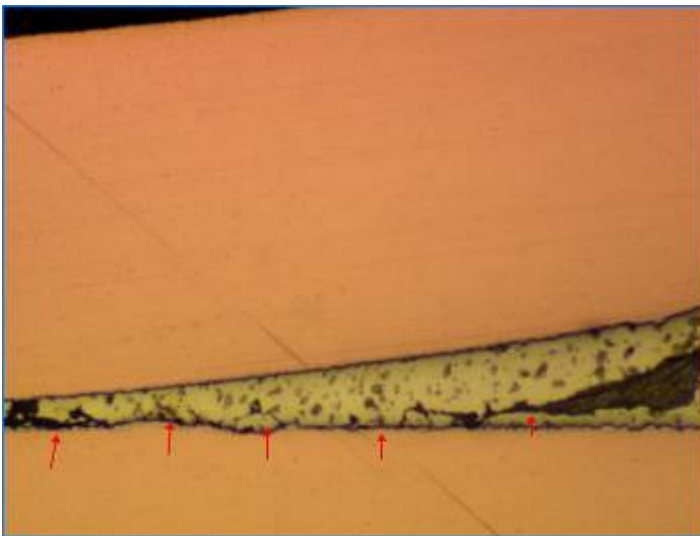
cross section, SN62, U31, left lead solder crack, 400x, b
